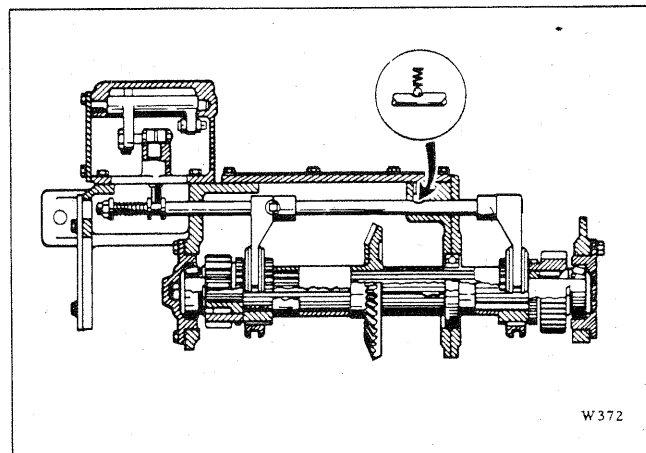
ADJUSTMENT OF CLUTCH LINKAGE, DIRECT DRIVE WINCH
